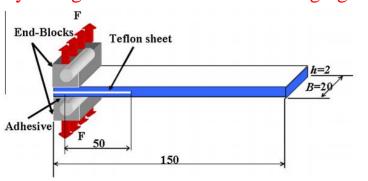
Geometry of DCB specimen (all dimensions in mm).
